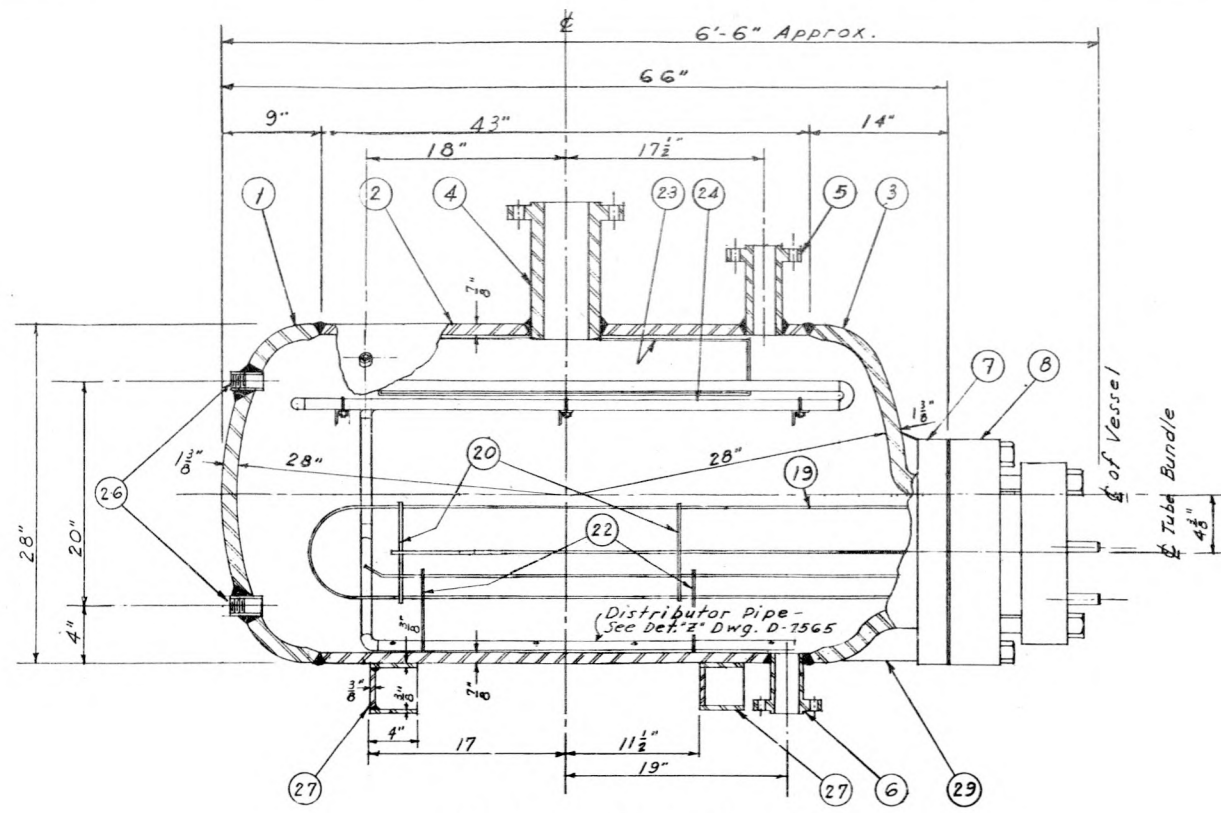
, 6, and 7 show actual construction details of the reactor steam generator, the soup pressurizer, and the concentric-core draw-off tubes, respectively. In Fig. 7 the outer tube is the pressurizer connection; the next inner one is the soup exit line, and the small inner one is the gas outlet.
